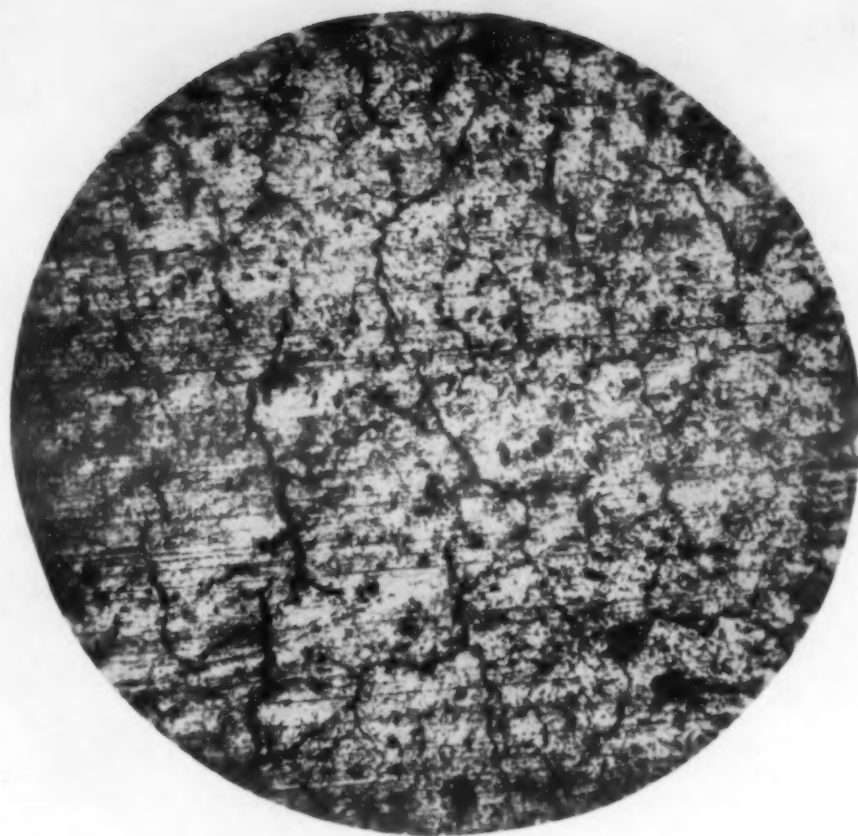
Thermal cracking on the surface of a brake drum. 10X.
